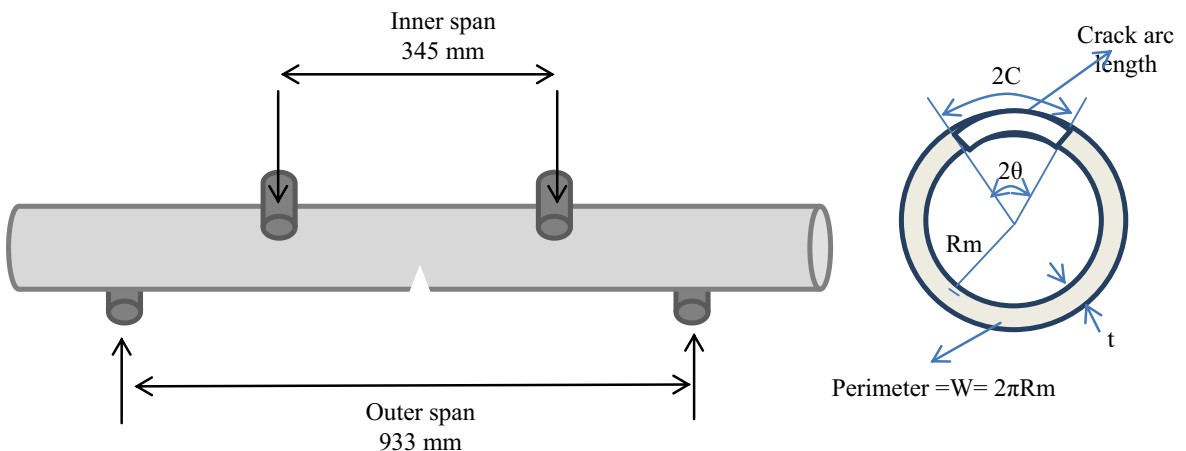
Pipe with through wall circumferential crack under four-point bending load scheme.
